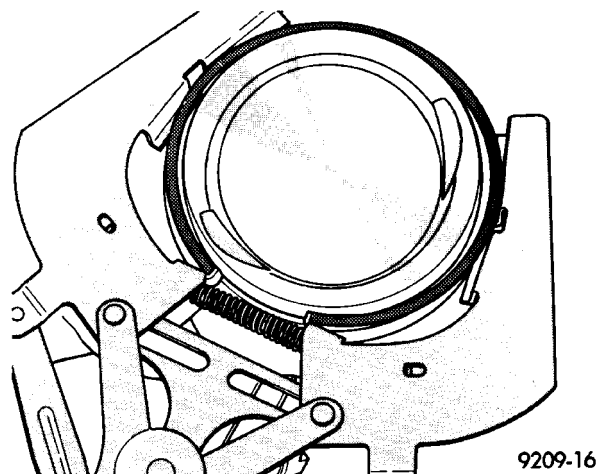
PISTON RINGS - REMOVAL/INSTALLATION INSPECTION
